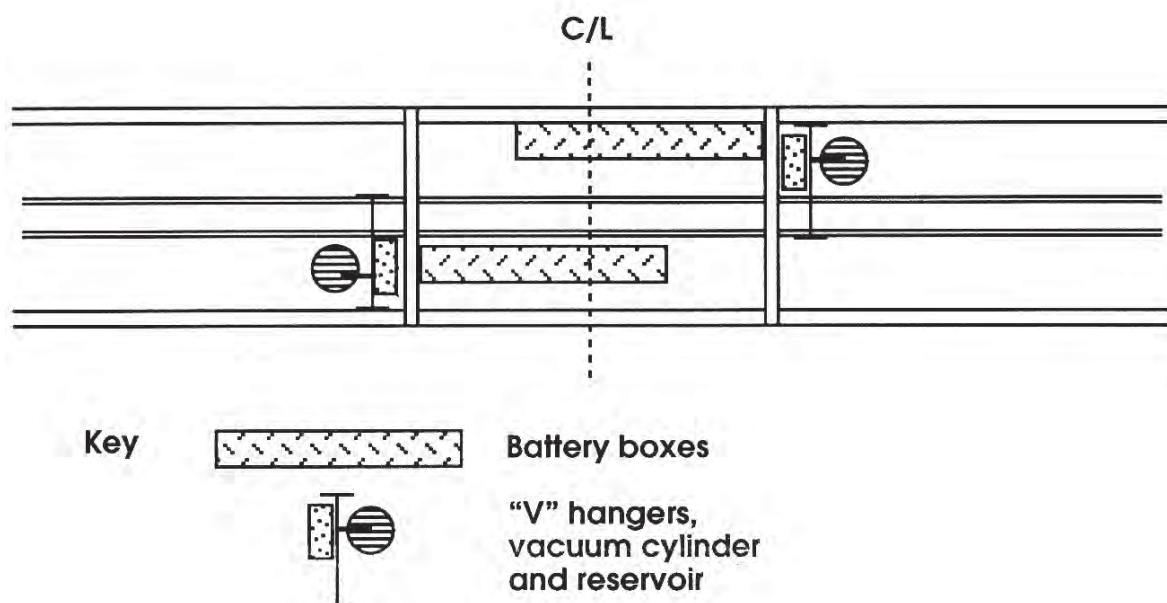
View on underside showing "conventional" style vacuum brake conversion and replacement battery boxes
